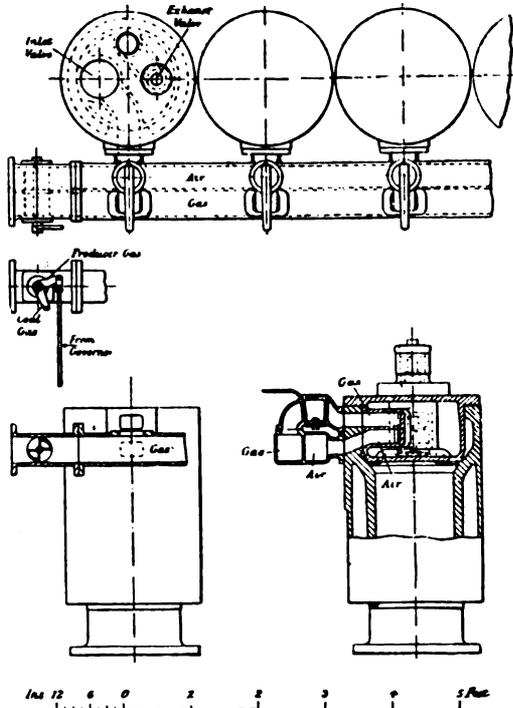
Mixture Regulation Device, Crossley vertical Engine.
